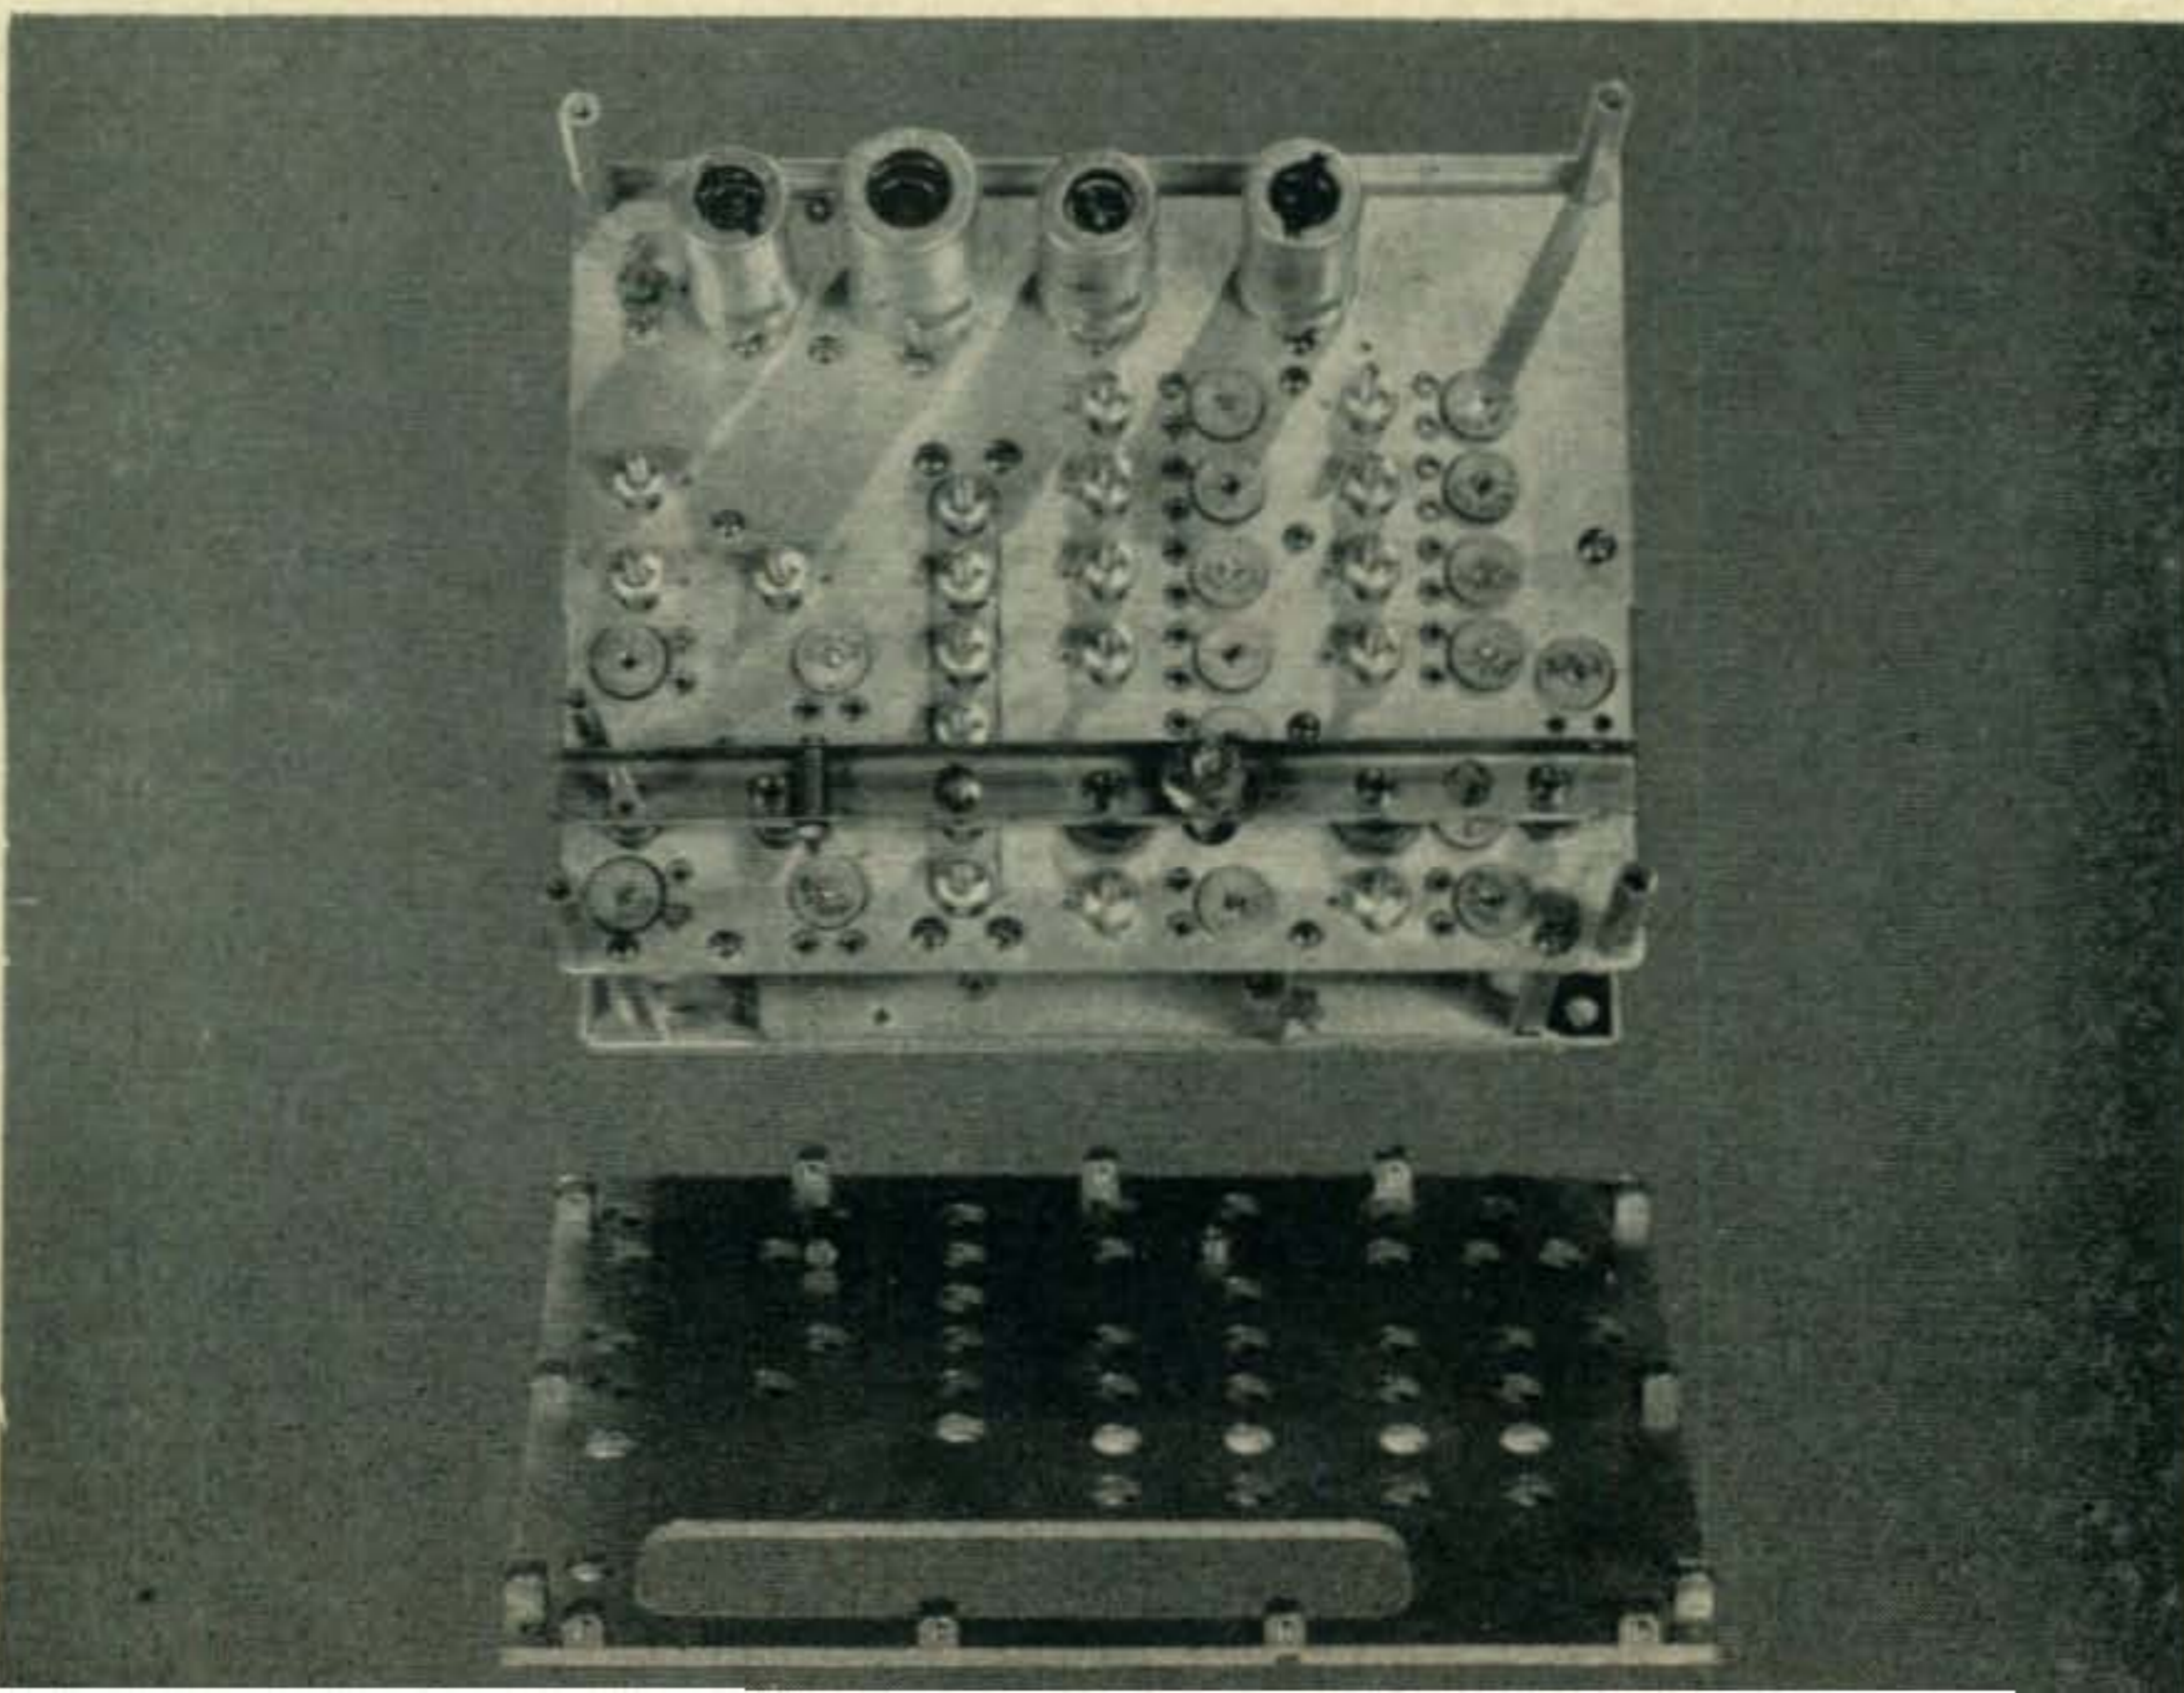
View of the r-f assembly showing wiring and all crystals installed.
